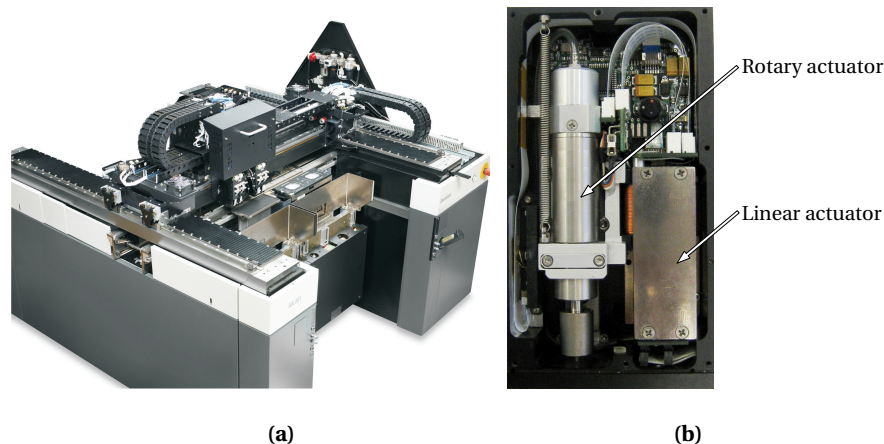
(a) Assembléon pick and place machine for placement of surface mounted devices. (b) SMAC placement head for a pick and place machine.
